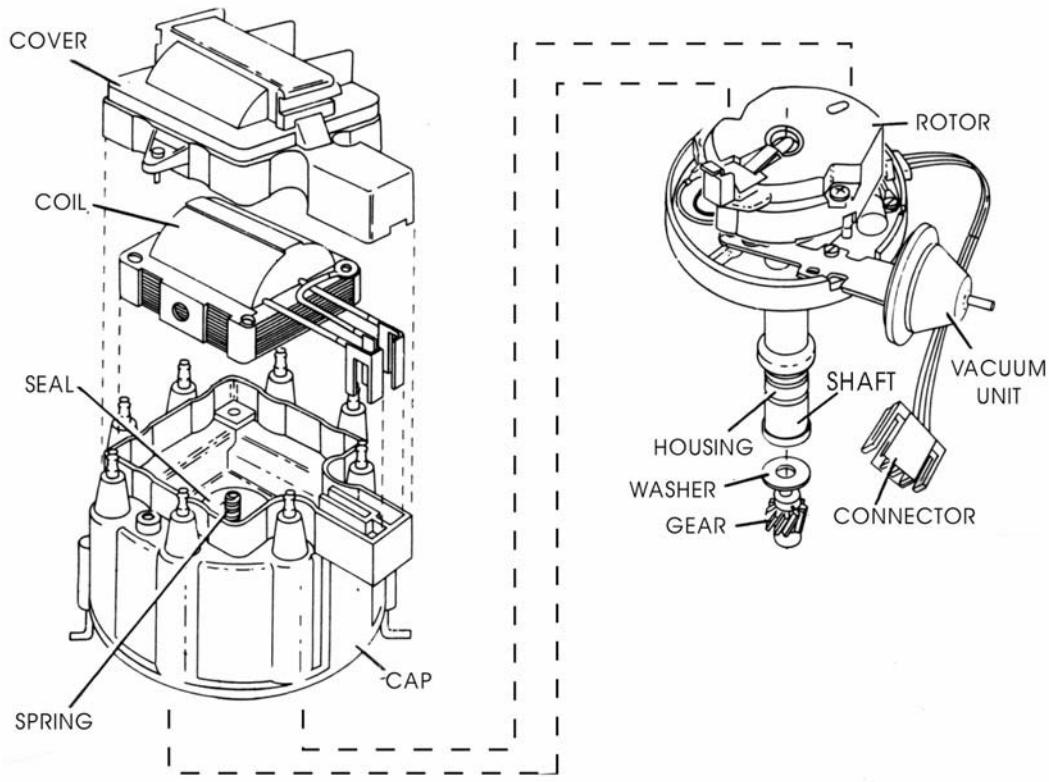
The components of a typical distributor are shown here. Note that the ignition coil is mounted inside this particular distributor.
